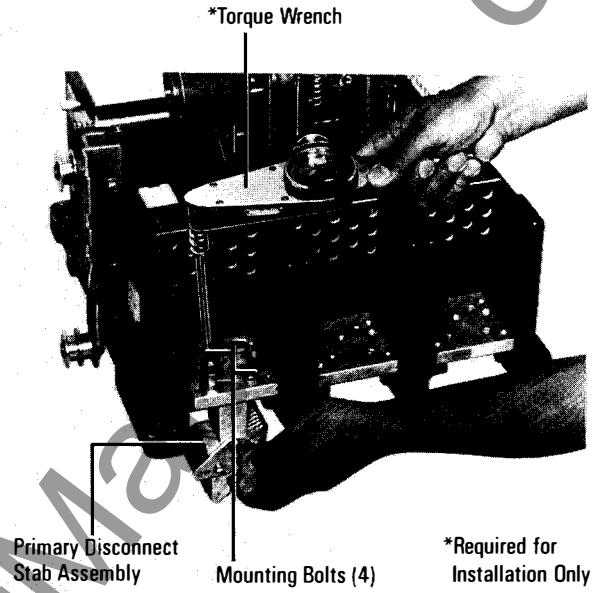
Installation/Removal Drawout Primary Disconnect Stab.
